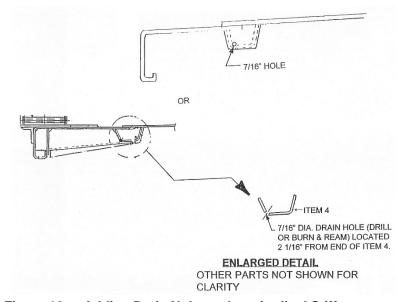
Adding Drain Holes to Longitudinal Stiffeners
